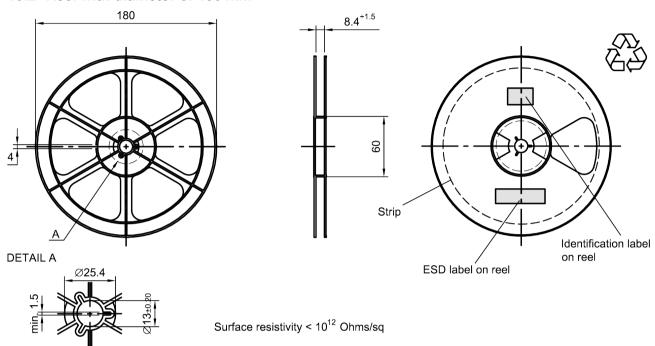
Drawing of reel (first-angle projection) with diameter of 180 mm.
